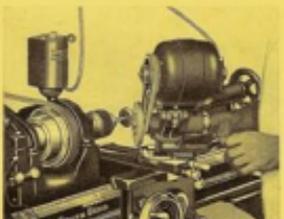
Grinding a Valve Face in the Auto Shop Lathe, using Electric Valve Grinder.
